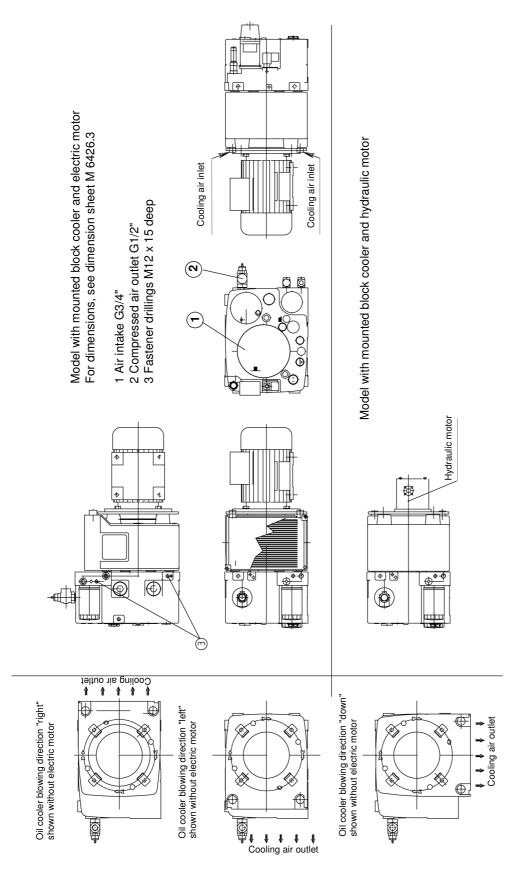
Model with mounted block cooler and electric motor / hydraulic motor
